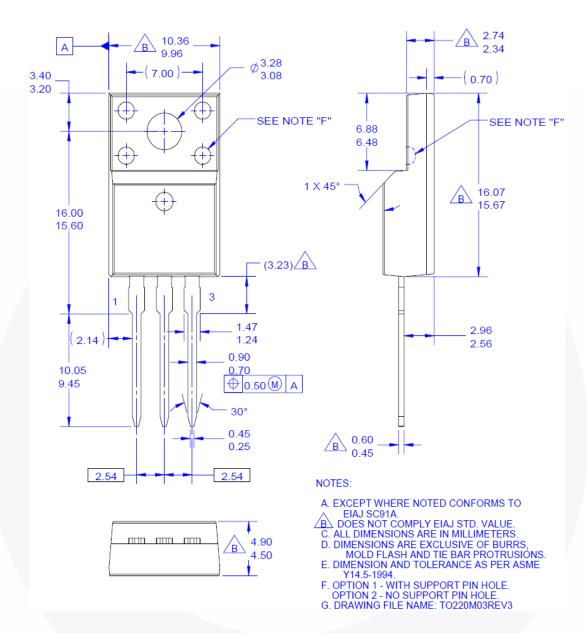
TO-220F 3L - TO220, MOLDED, 3LD, FULL PACK, EIAJ SC91, STRAIGHT LEAD
